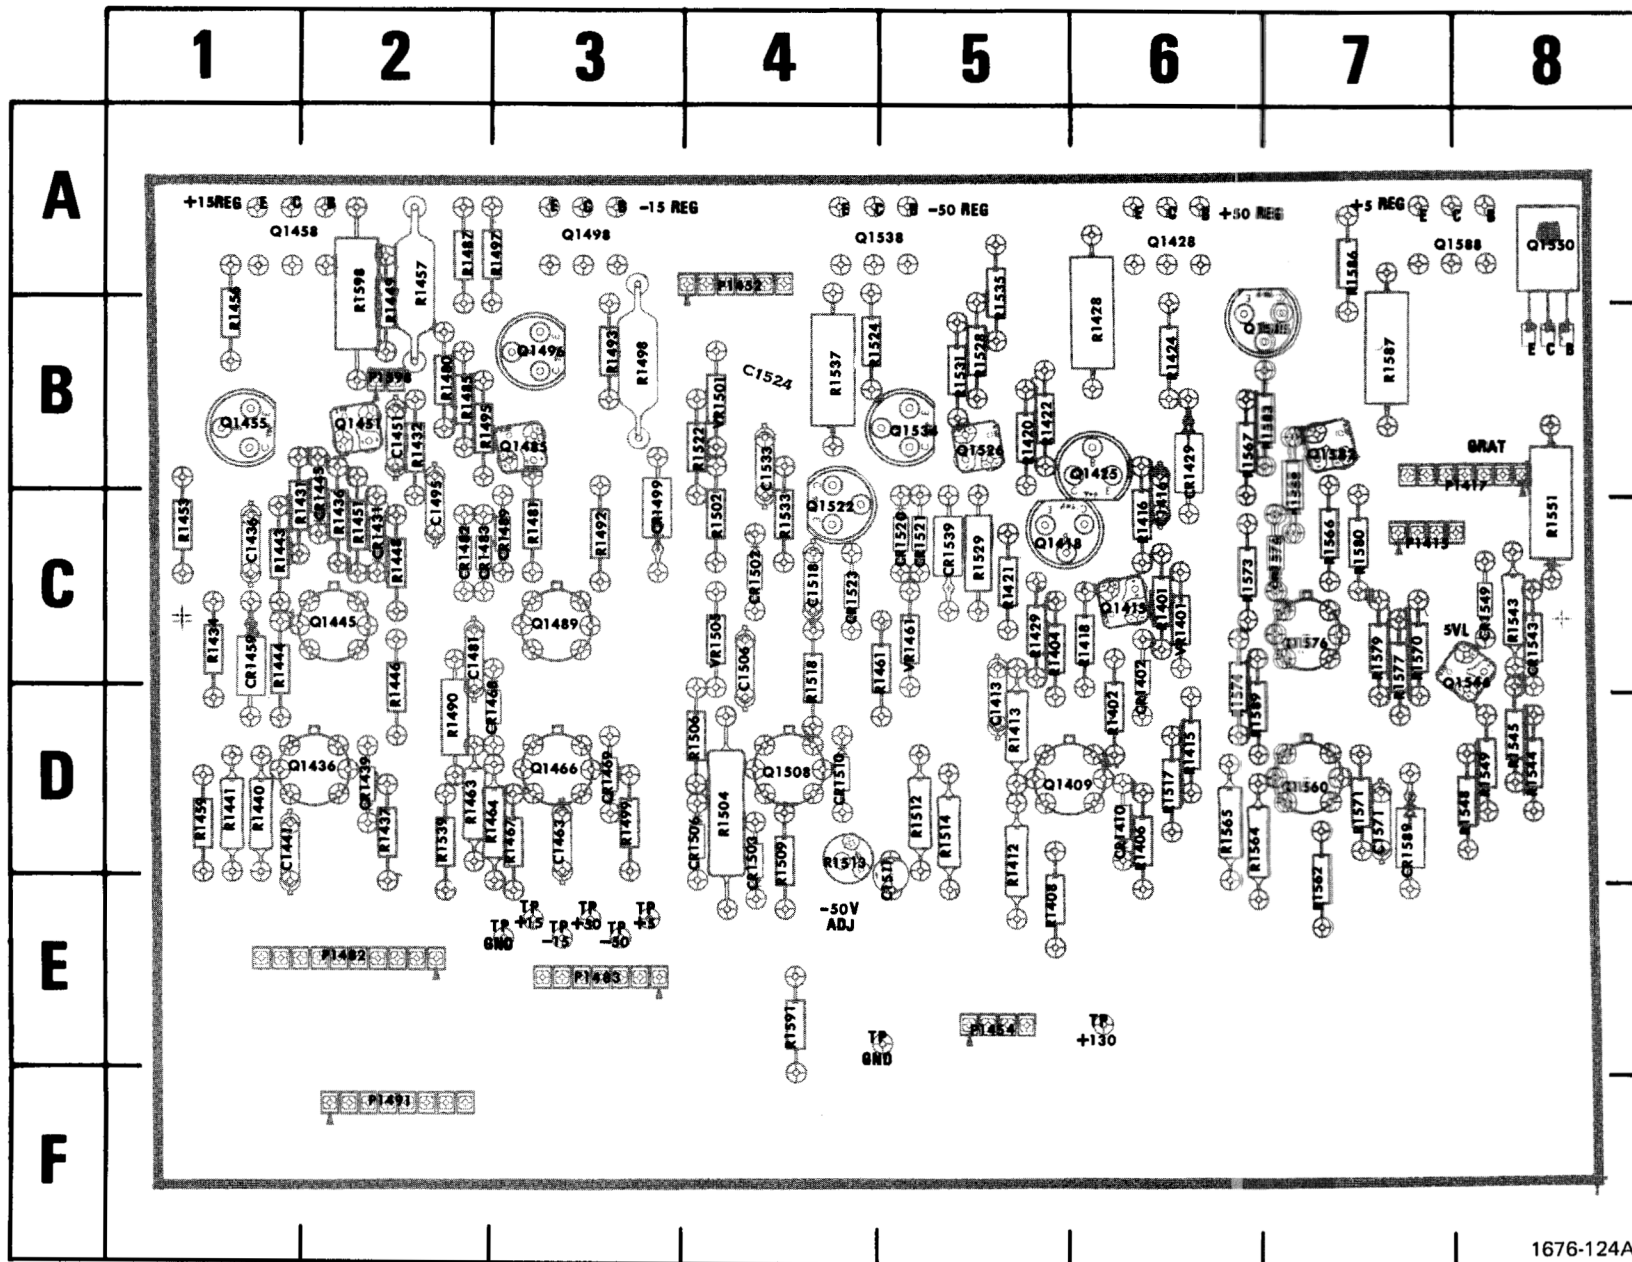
A29—Low-Voltage Regulator circuit board assembly.
